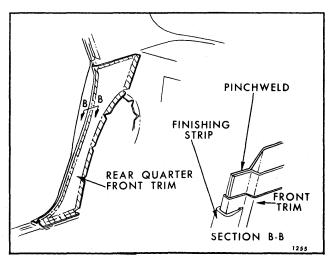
Rear Quarter Trim Assembly - Oldsmobile 33839, 69 and Buick 44439 Styles
